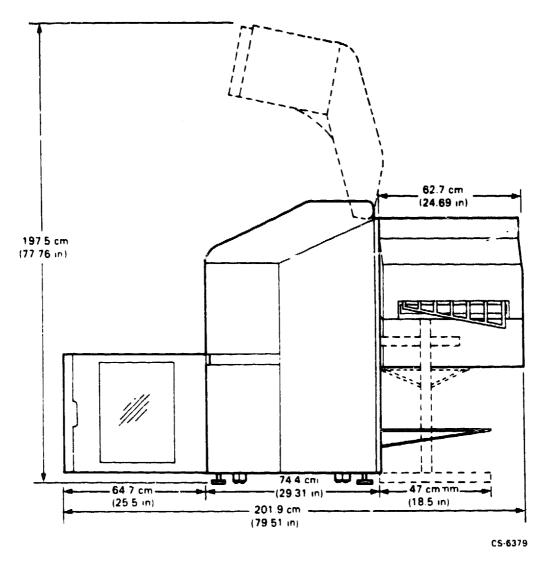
Line Printer Access Requirements (LP29 Printer Shown)
